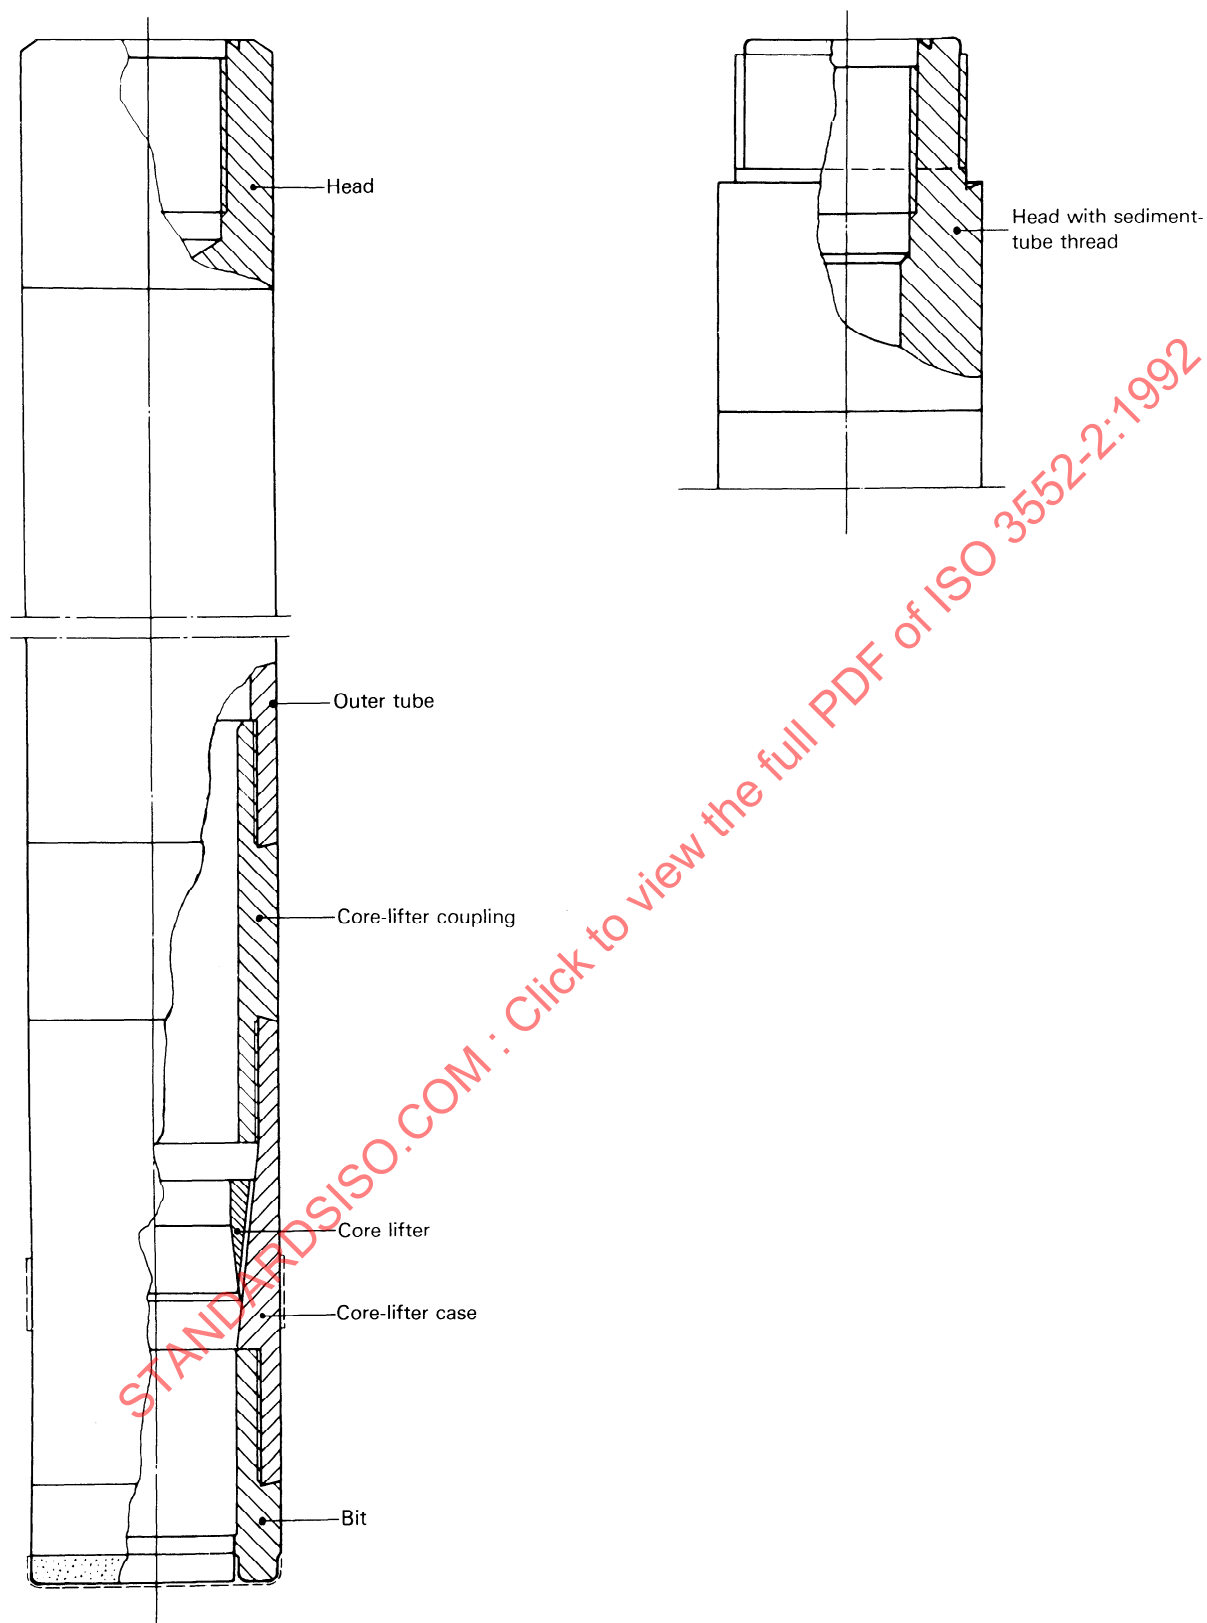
Core barrel, Type B — Head with sediment-tube thread (see table 24)
